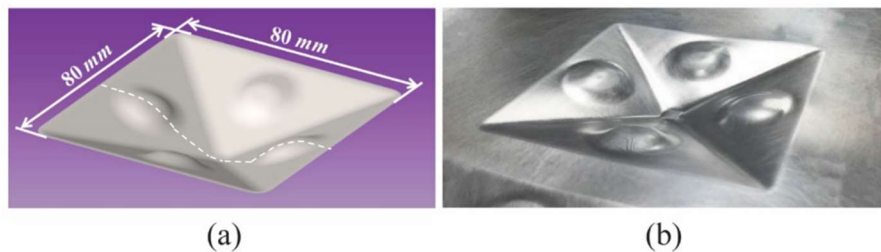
(a) CAD model of desired geometry; (b) formed part
